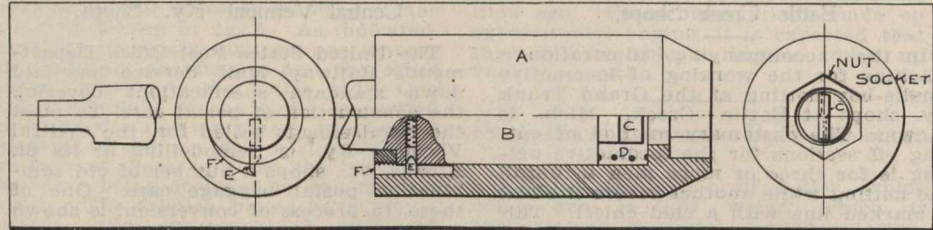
Tool for Removing Burr from Bruised and Damaged Bolts and Nuts, and Unscrewing.
